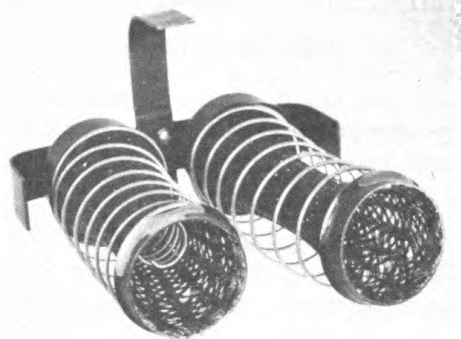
"Chinese handcuff" shield assembly for Model II Series.
